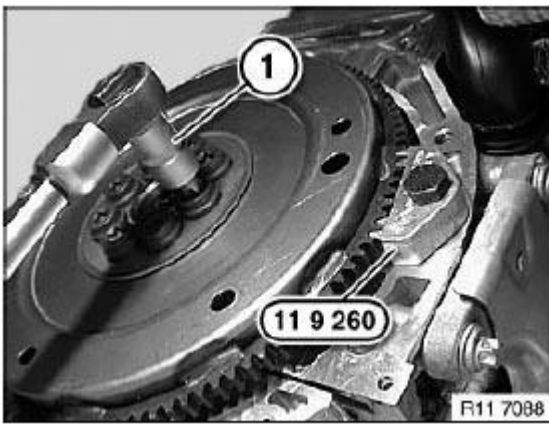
Securing Flywheel Using Special Tool 11 9 260
